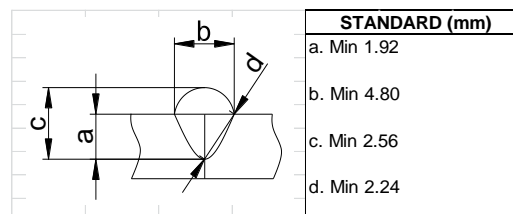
Standard Bead and Welding Penetration for Axle Housing
